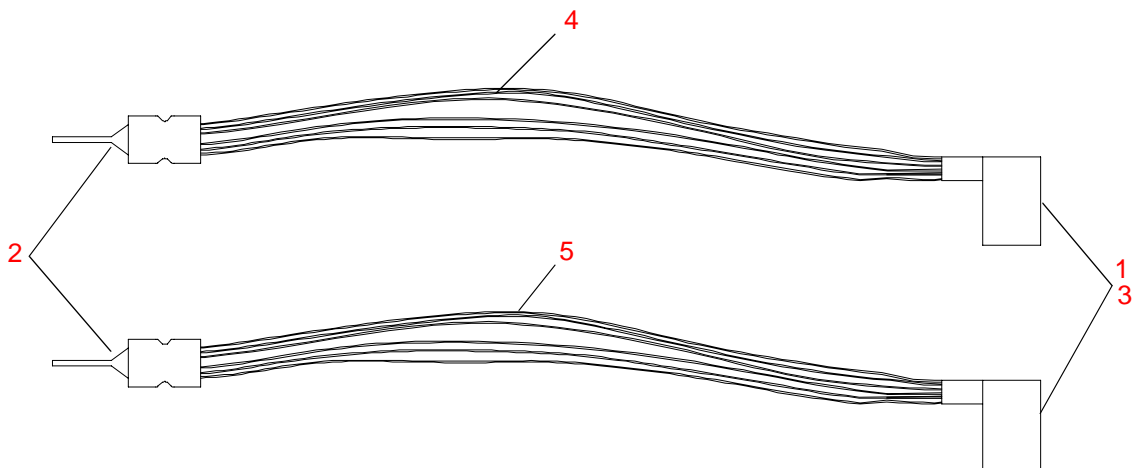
VL6B/VL6C Ignitor Board Input Cable Assembly
